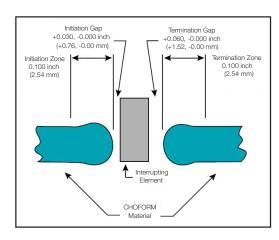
Top View Location tolerances for bead initiation & termination zones (cross-sectional view)
